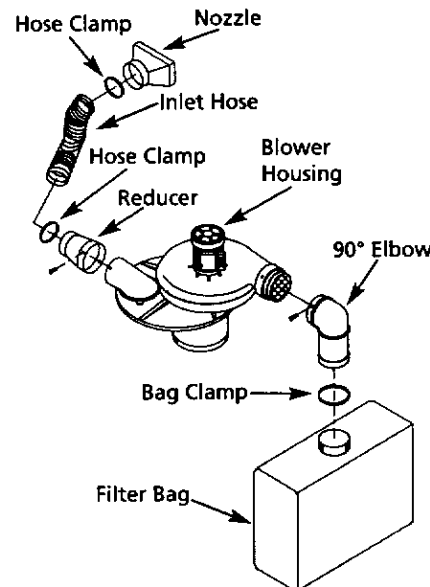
Mounting Elbow, Hose, Filter Bag and Nozzle
